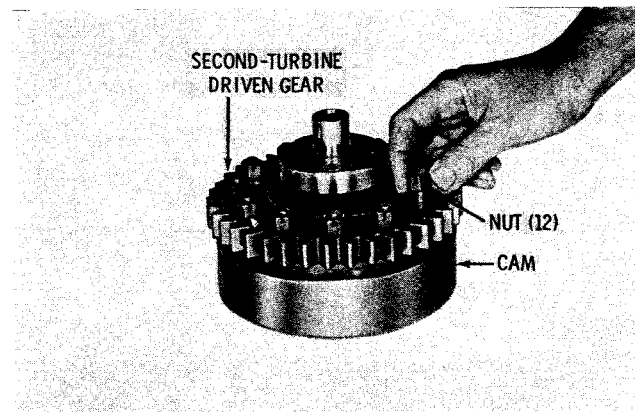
Installing nuts to retain the second-turbine driven gear
